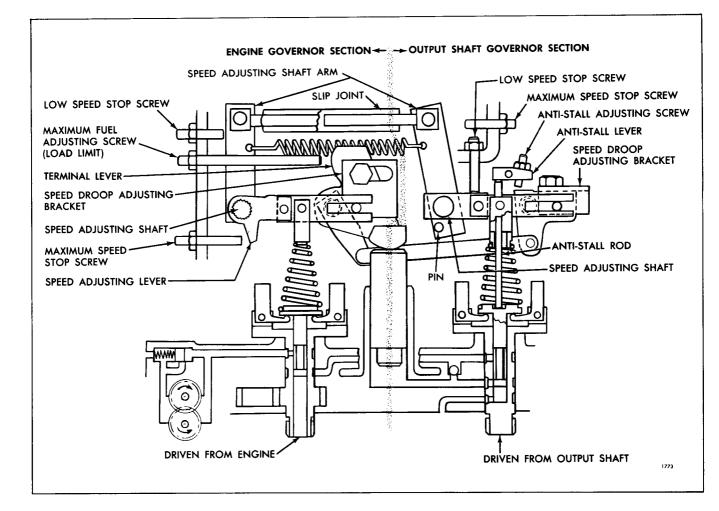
Schematic Diagram of Single Lever Governor Assembly
